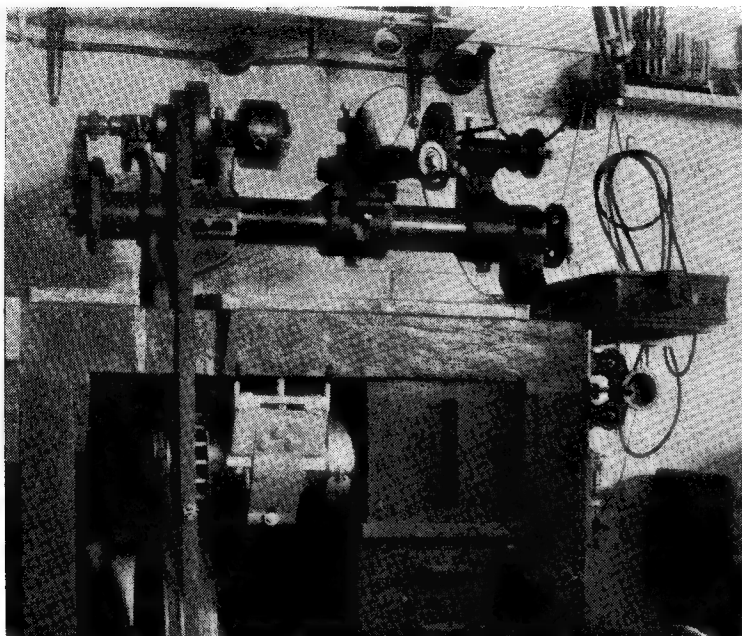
The Drummond 4-in. lathe connected to a "Homelite" generator
